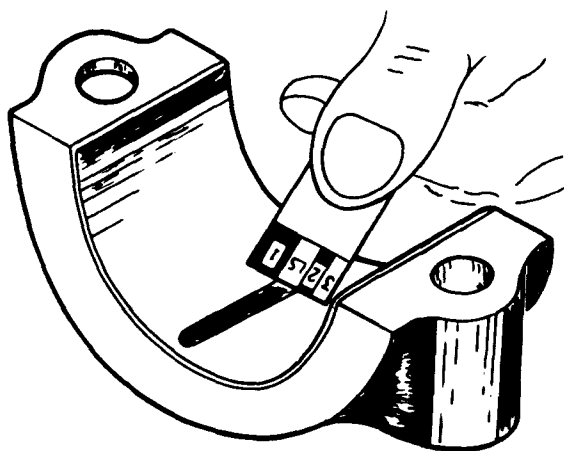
Measuring Bearing Clearance with Envelope Scale
